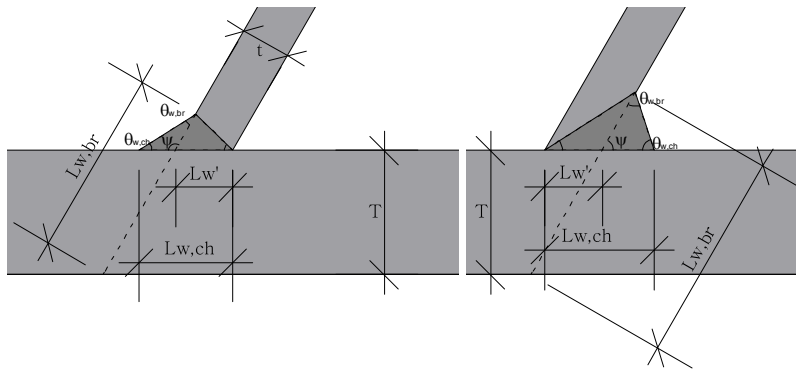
Dimensions needed to define weld geometry - left, crown toe and right, weld crown heel.
